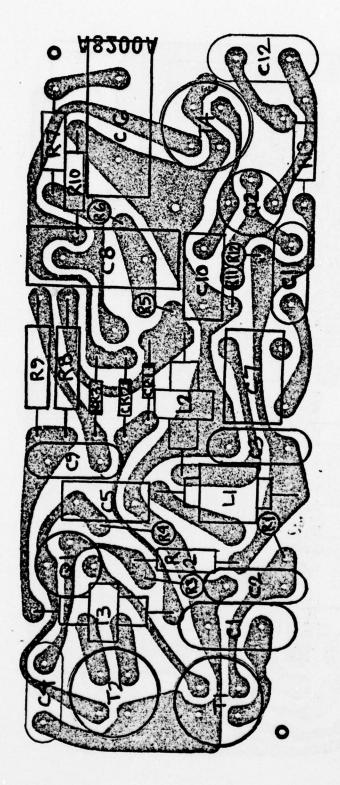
P.C. BOARD LAYOUT FOR THE A8200A TRANSMITTER PHASE DISCRIMINATOR ASSEMBLY
